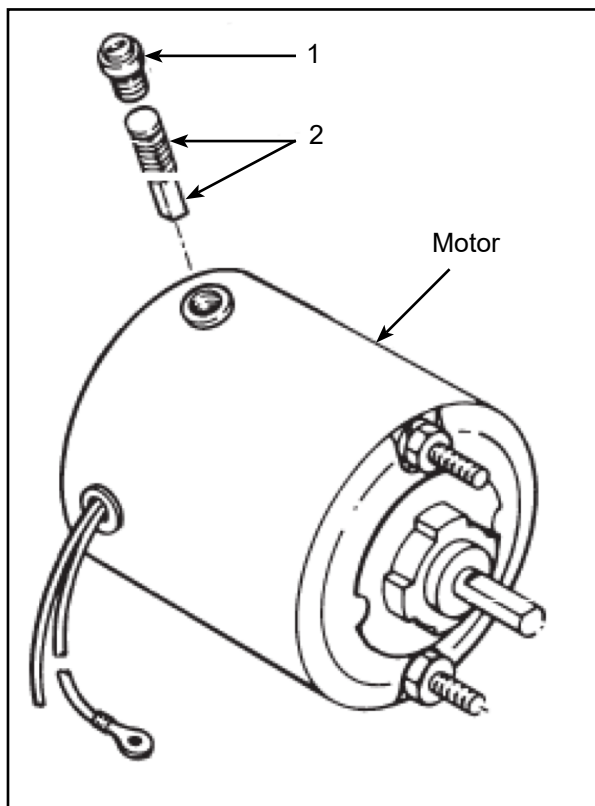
Motor P/N 86D64-() Brush Replacement
